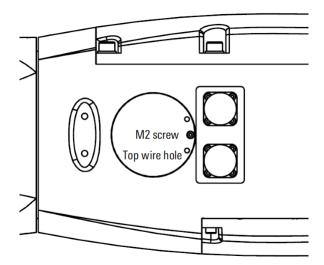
AIR8-710A type manipulator arm solenoid valve cover screw and jack hole
